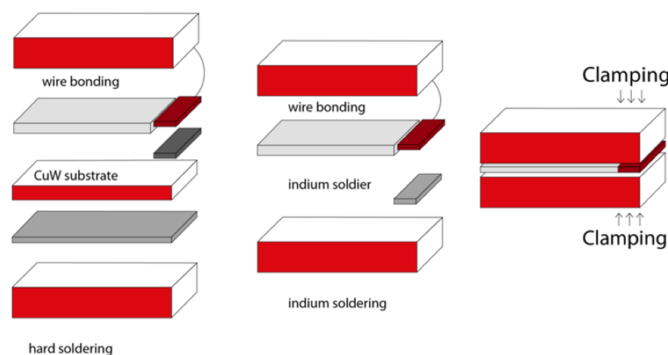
Schematic view for laser bar mounting with (left) hard soldering, (center) soft soldering with indium, and (right) clamping.
